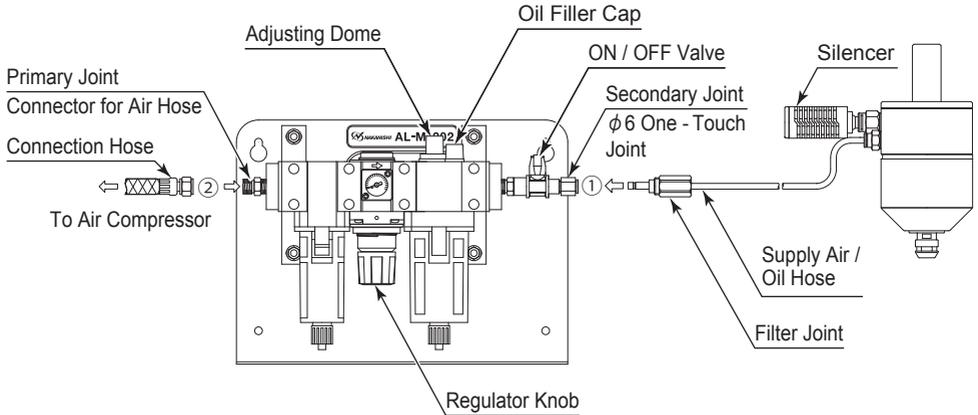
Connection of Air Line Kit " AL - M1202 (Sold Separately) "
